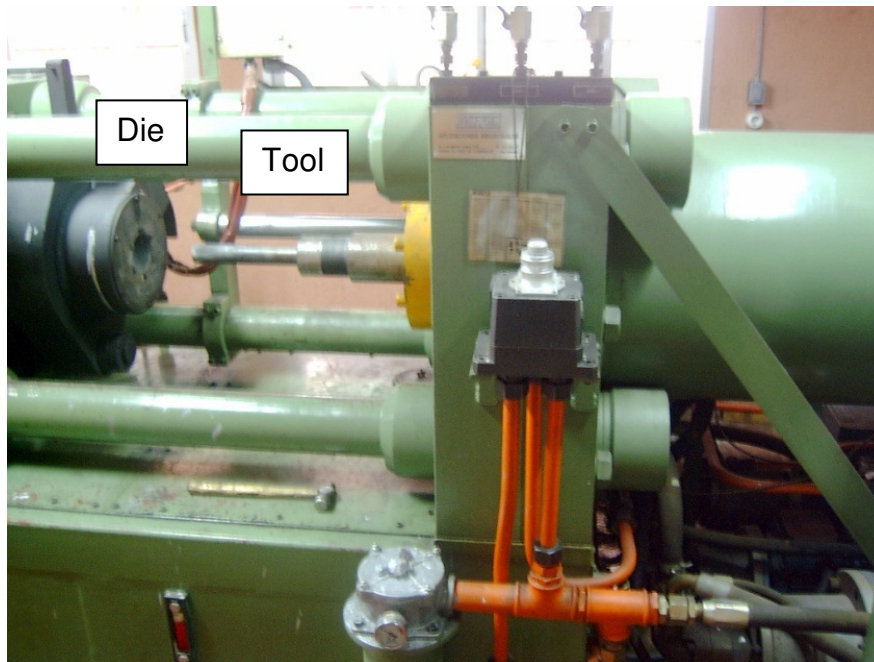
Extrusion device used to fabricate the introduced materials at 450°C and a diameter of 11.8mm
